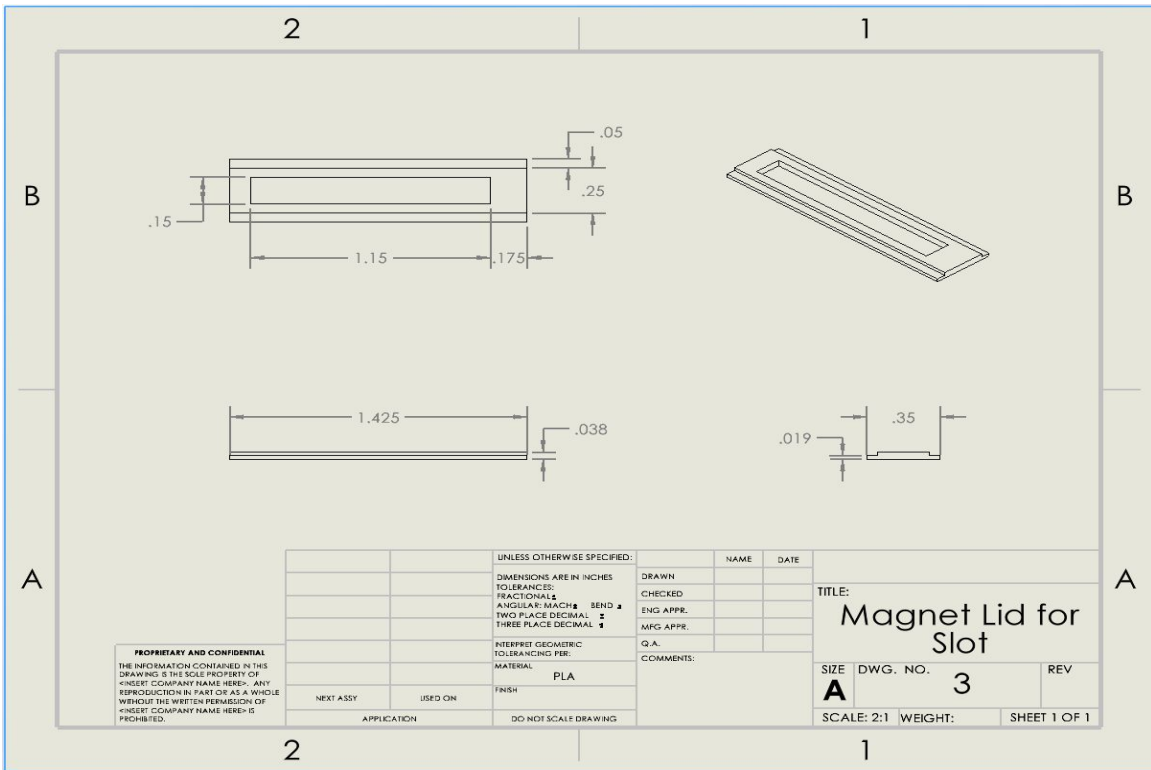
The dimensioned engineering drawing of the magnet lid for the top slot
